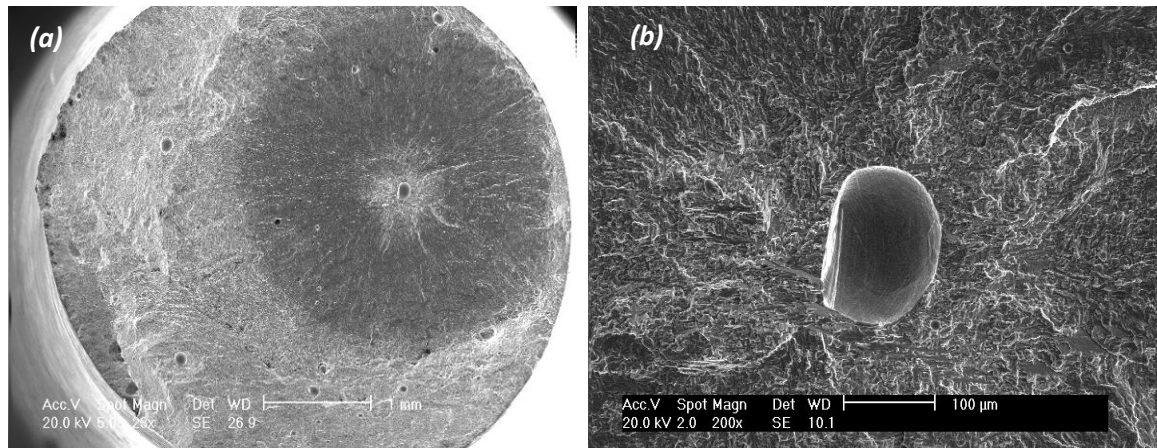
Fractograph of sample (a) V-F14 and (b) H-F3 from build 2 and 3 using the WAAM process showing that the fatigue crack initiated at pores close to the specimen surface in each case and that the fracture path was affected by the large prior  $\beta$ -grain structure.
